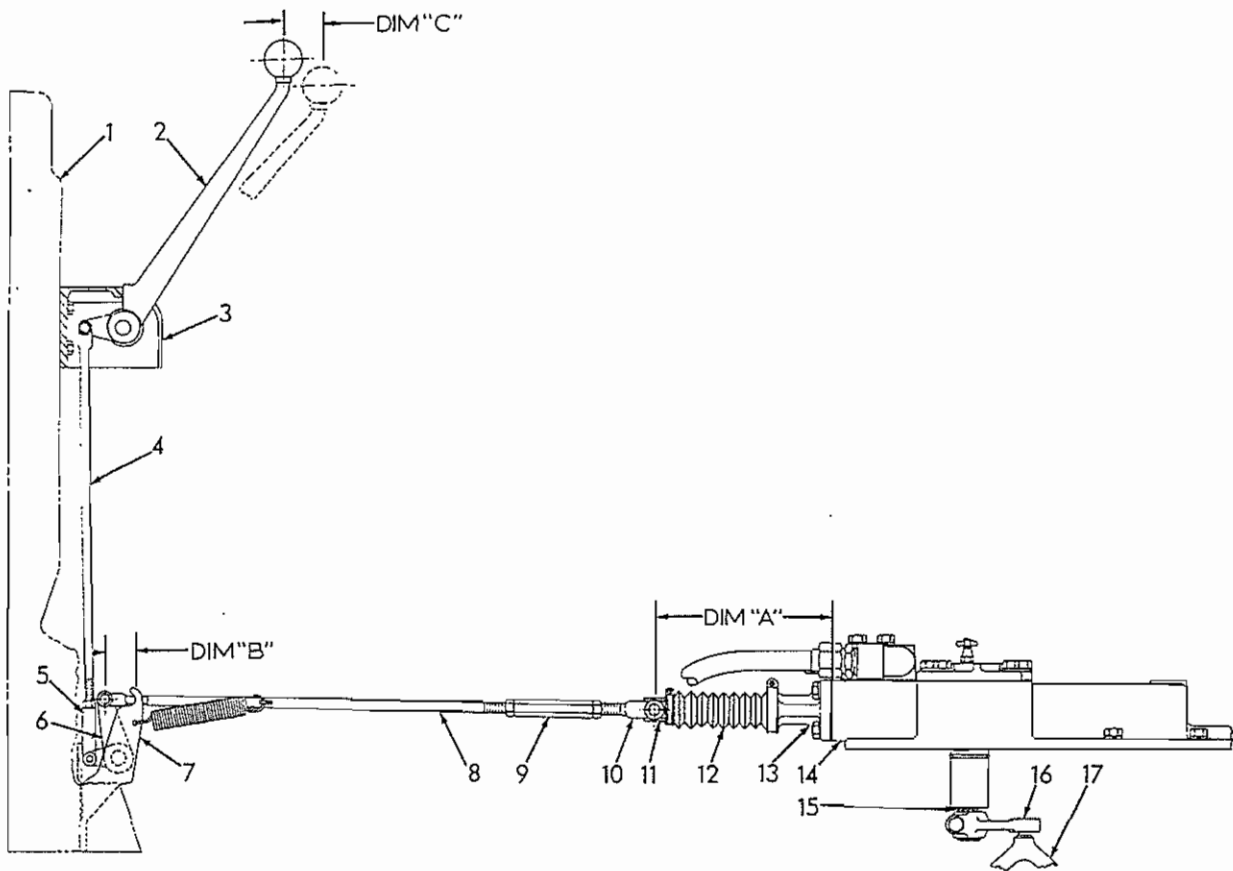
HD11 (S/N 6069 - 10000) Steering Control Linkage (T-72036)
